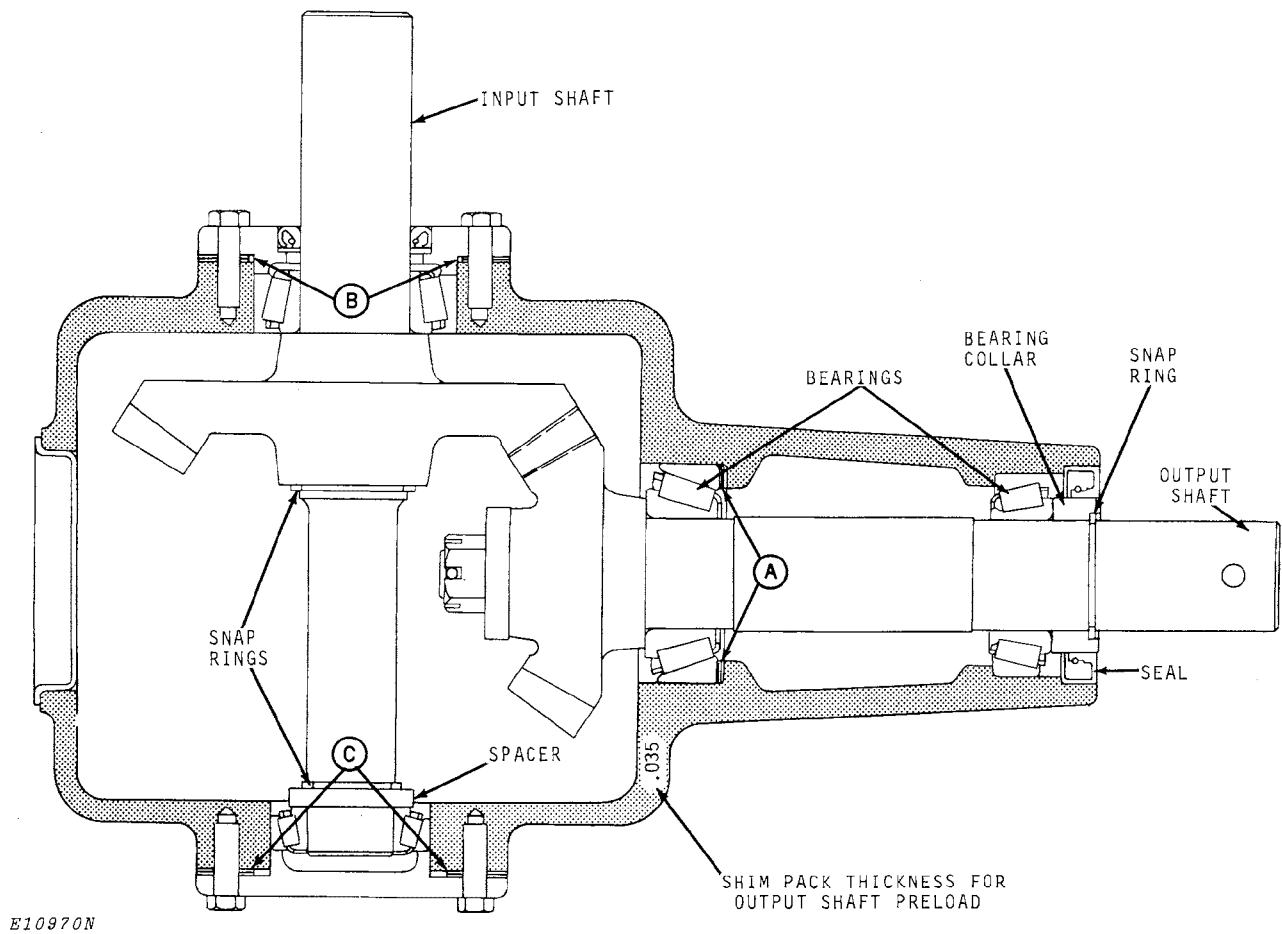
Adjusting Bevel Gear Backlash and Bearing Preload
